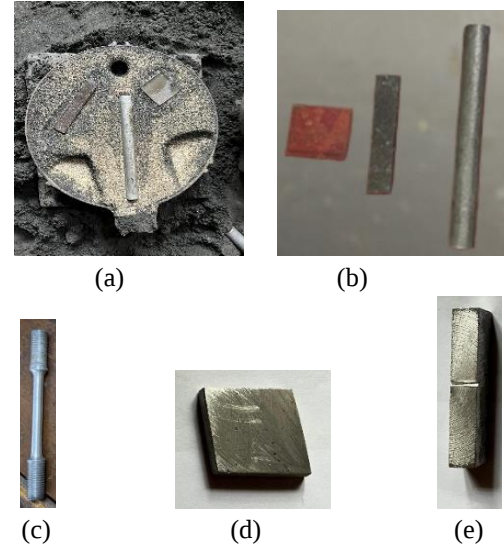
(a), (b) Patterns for making molds. (c) Tensile Test Specimen, (d) Hardness Test Specimen, (e) Impact Test Specimen.
